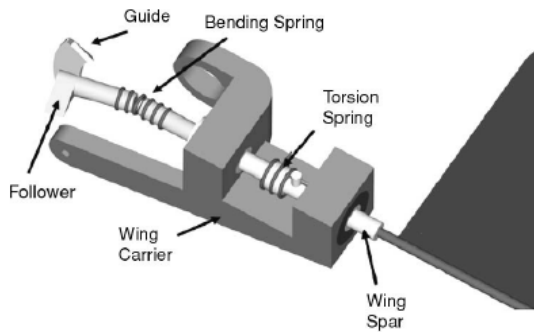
A schematic diagram depicting the wing carrier assembly. The torsion spring is attached to the wing spar and the bending spring is bent allowing follower to move along the guide.
